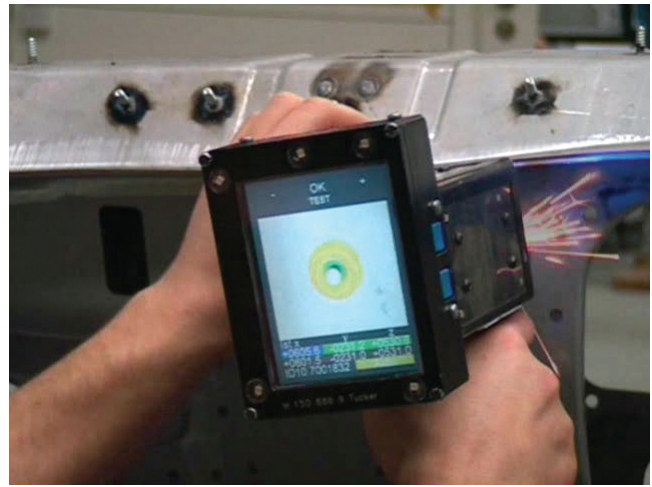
The Intelligent Welding Gun is the first AR based product to be used in the manufacturing industry. The welder has access to navigation information on a screen attached to his welding gun that helps find the next stud location. *Courtesy of Gudrun Klinker.
